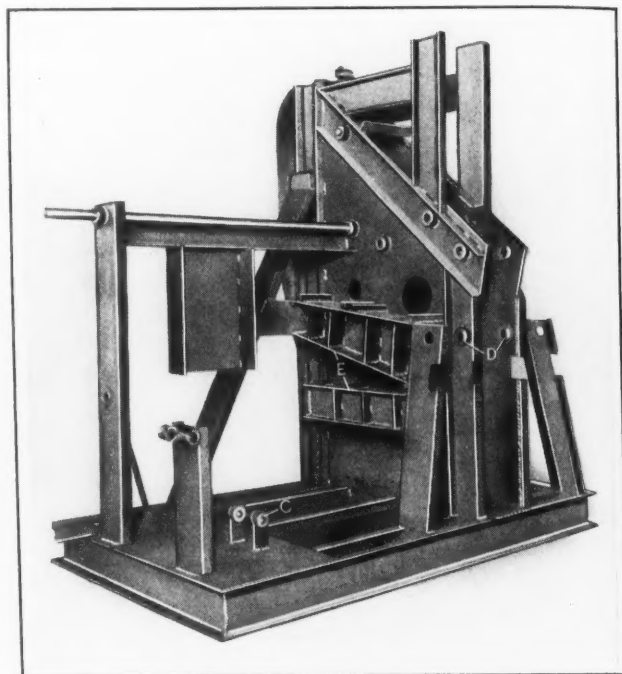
Arc-welded Frame of Machine Shown in Fig. 1
